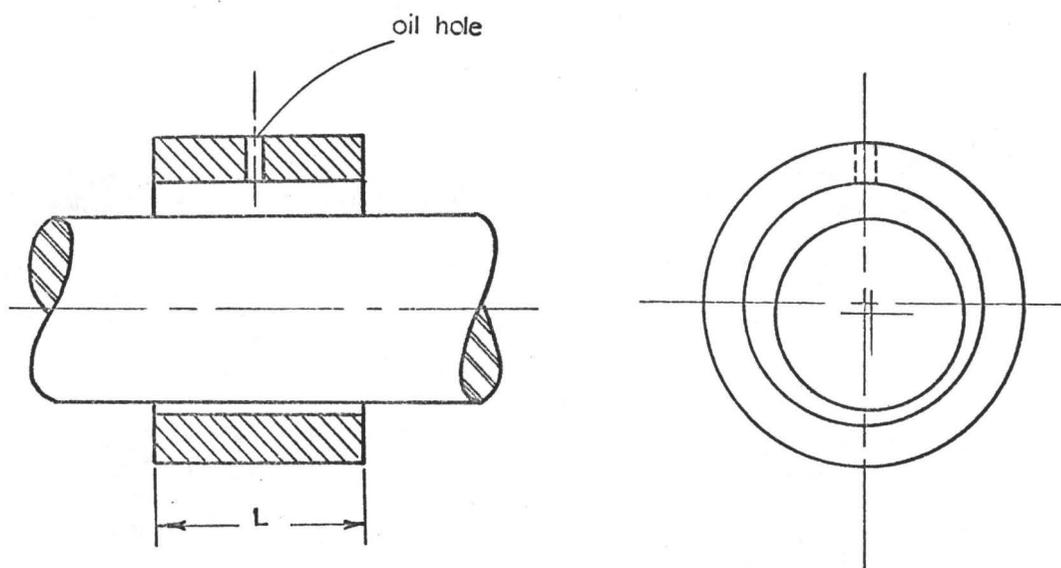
Full_cylindrical journal bearing with a single oil hole
